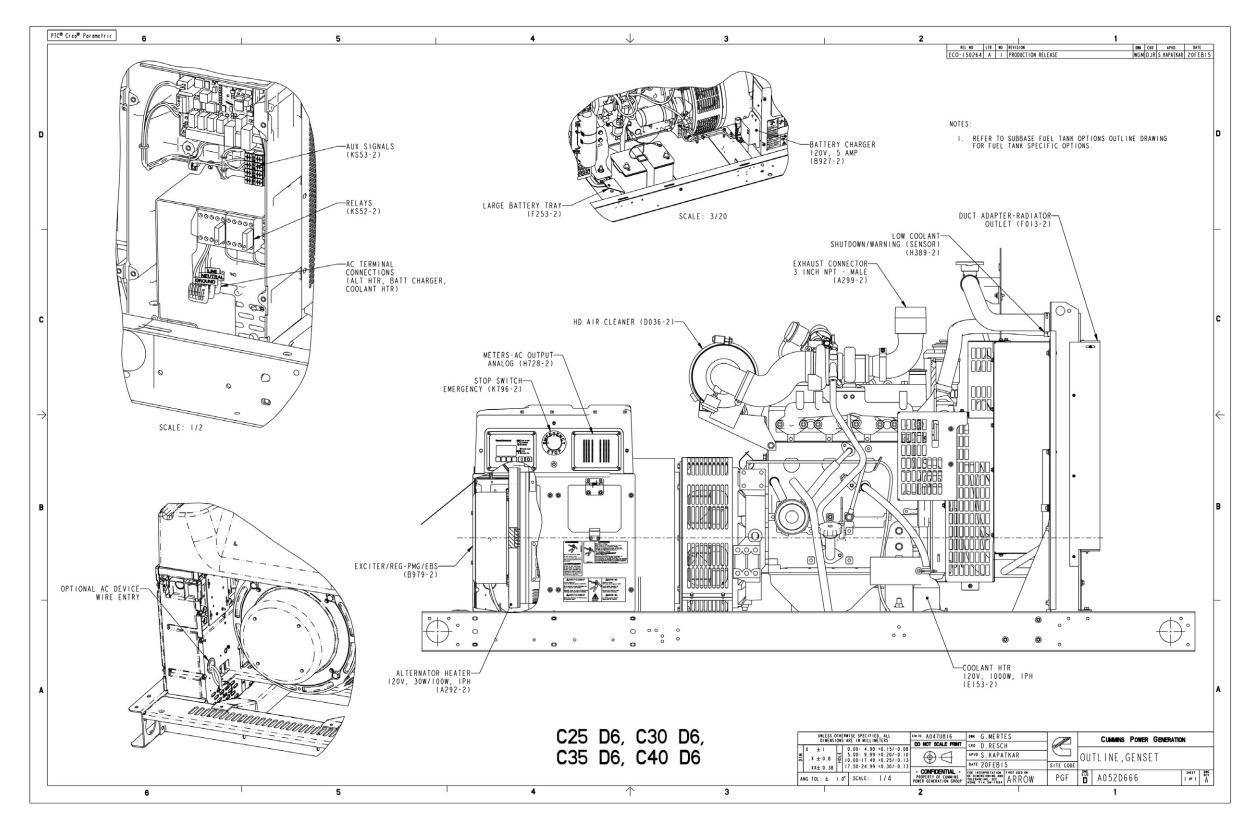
OUTLINE DRAWING (SHEET 1 OF 1)
